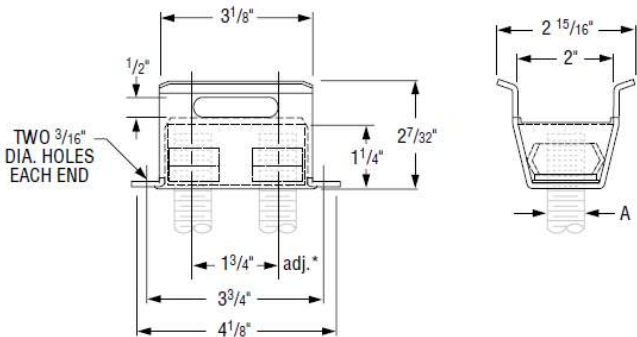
LOAD (LBS) WEIGHT (LBS) DIMENSIONS (IN)
